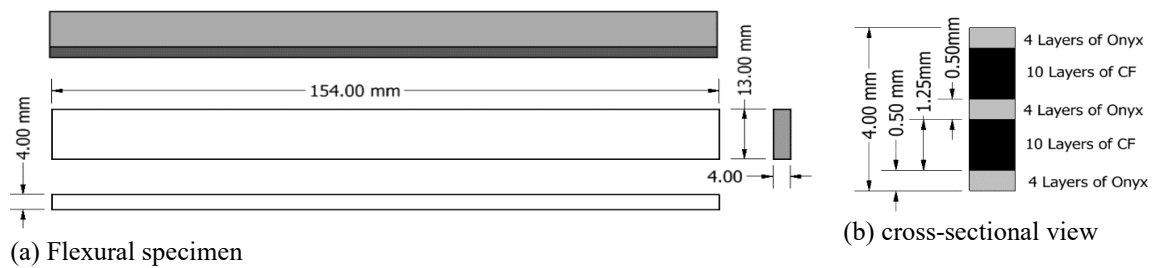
Flexural specimen and detail section view of layers and assigned material.
